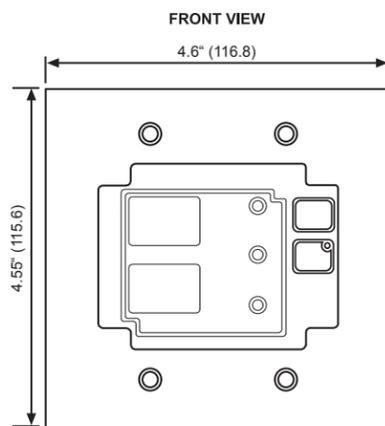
Two-gang wall plate dimensions in inches (mm)
